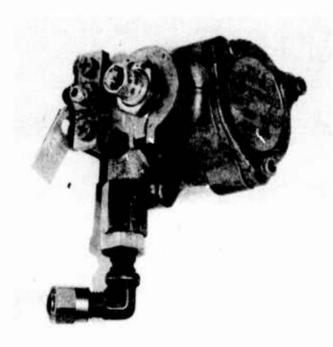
Post-Endurance Test Parts (Engine Serial No. 3301)
